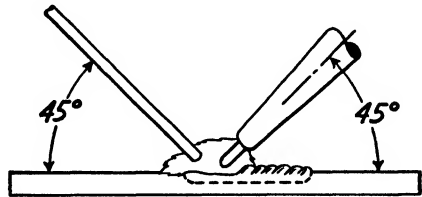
In depositing a bead, move the puddle gradually forward, using a circular weaving motion. Add metal from the welding rod by dipping it into the puddle at regular intervals. Do not let metal drip from the rod.
